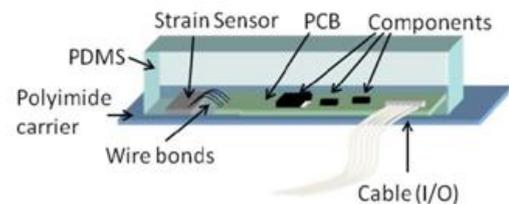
Drawing of strain sensor front-end module indicating the components.
